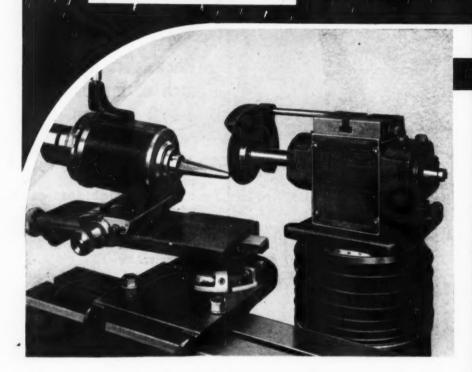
Photo above: No. 1 Radius Grinding Attachment mounted on the table of a CINCINNATI No. 2 Cutter and Tool Grinder. The four drawings illustrate the shapes that can be ground on your cutters.
